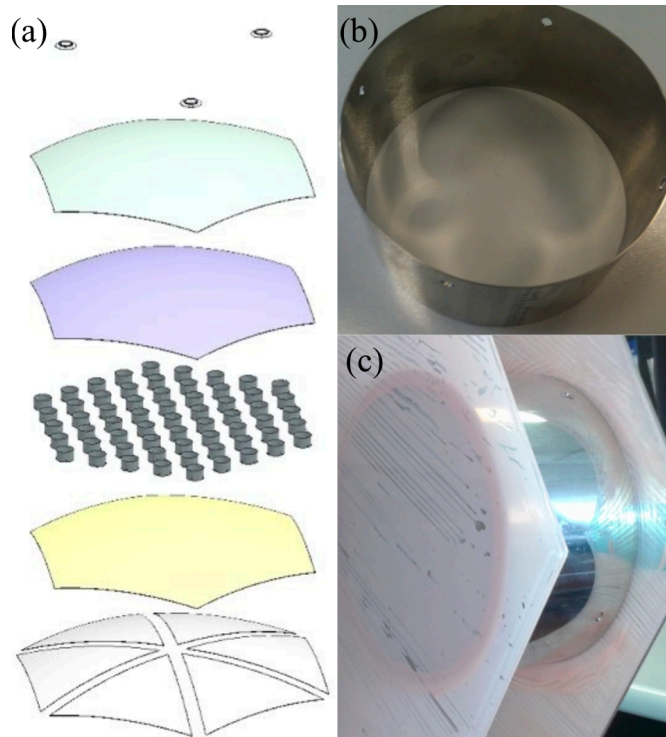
(a) Exploded view drawing of the open structure mirror. (b) Stainless steel cylinder. (c) Detail of assembly with glass sheets interspaced by a cylinder [Schultz et al., 2015].
